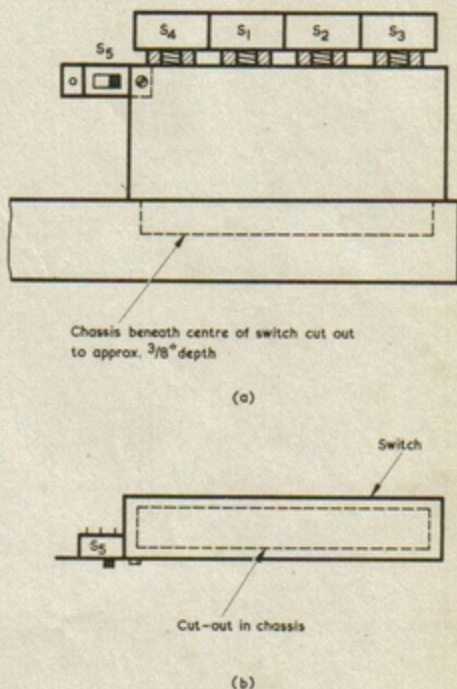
Side view (a) and top view (b), showing how the chassis is cut out to take the main switch assembly
